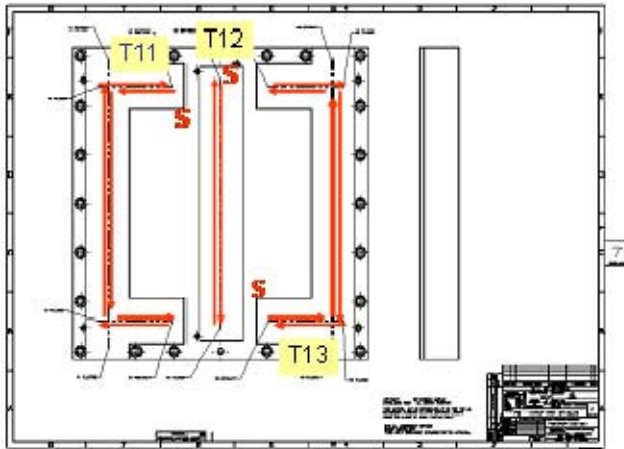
Schematic of the Locations of the Welds on the 1st Layer of the Top Surface.
